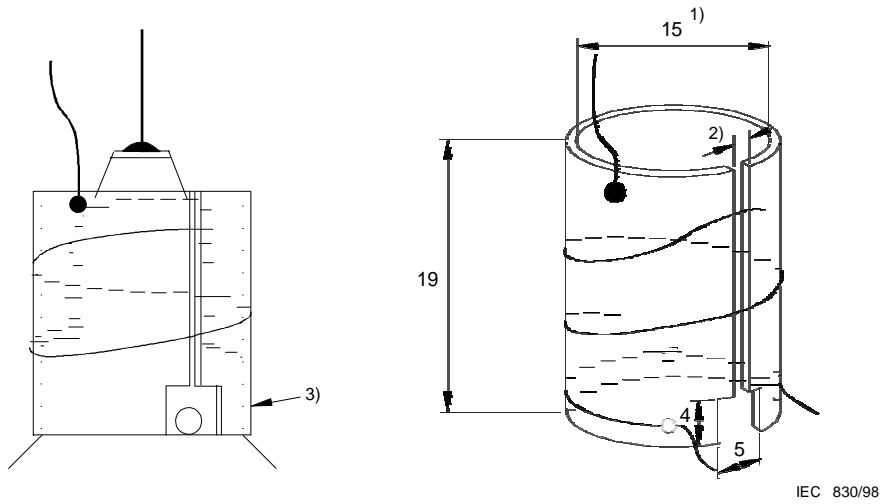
Approximate dimensions of test lampholder for E26/50 × 39, E27/51 × 39, E26, E26d and E27
